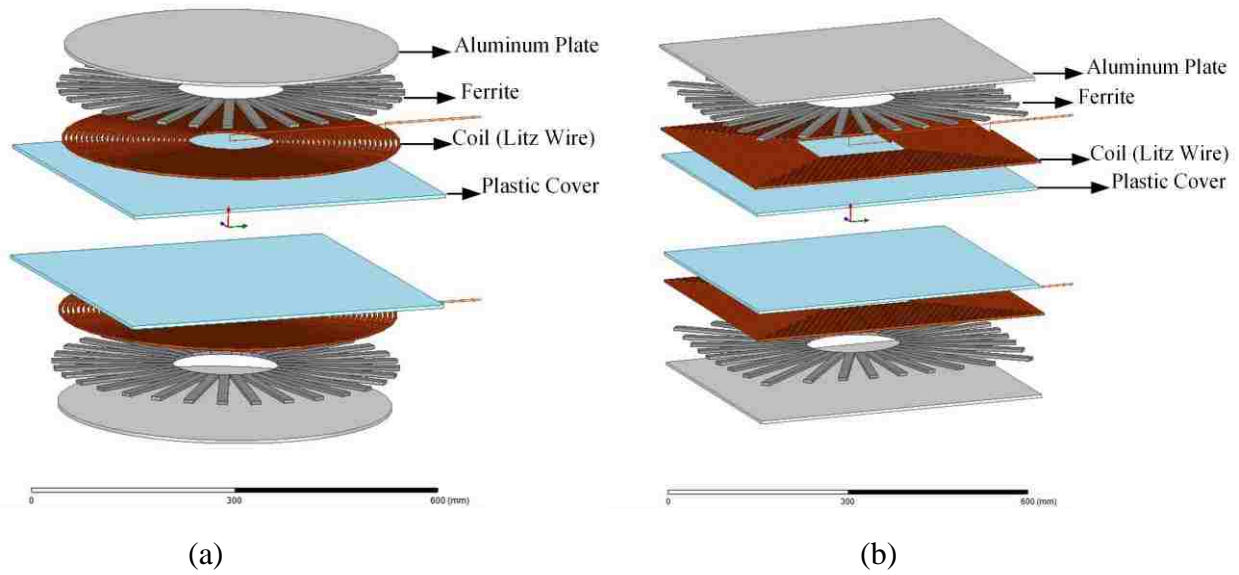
Exploded view of (a) circular pad with ferrite bars (b) square pad with ferrite bars.
